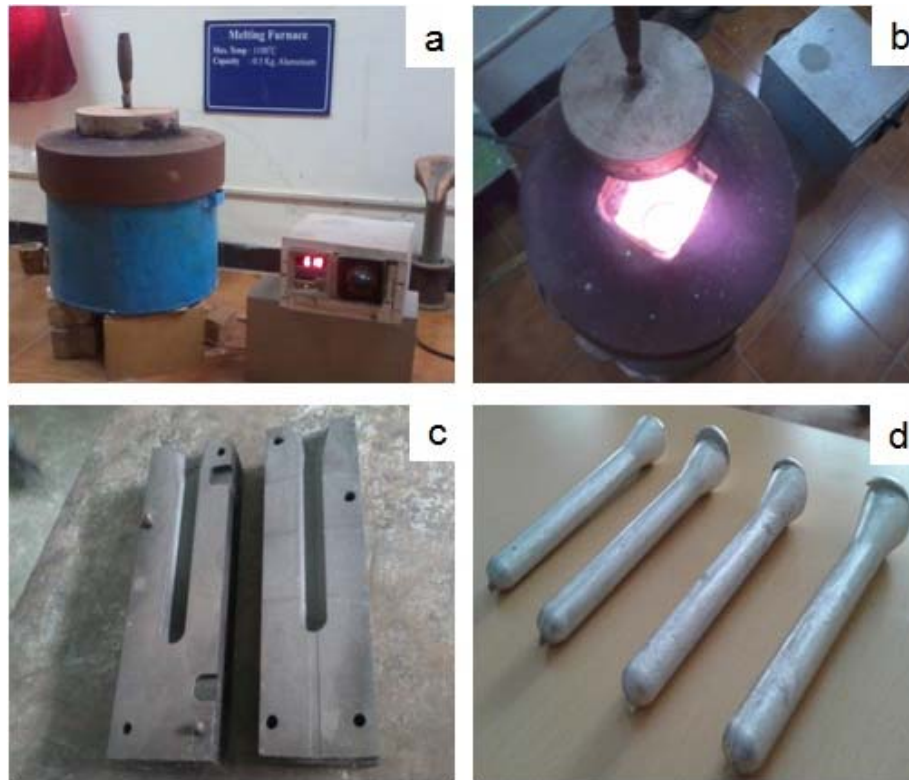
(a) Furnace with closed condition (b) Liquid melt inside the furnace (c) Cast iron mould (d) Castings produced after solidification
